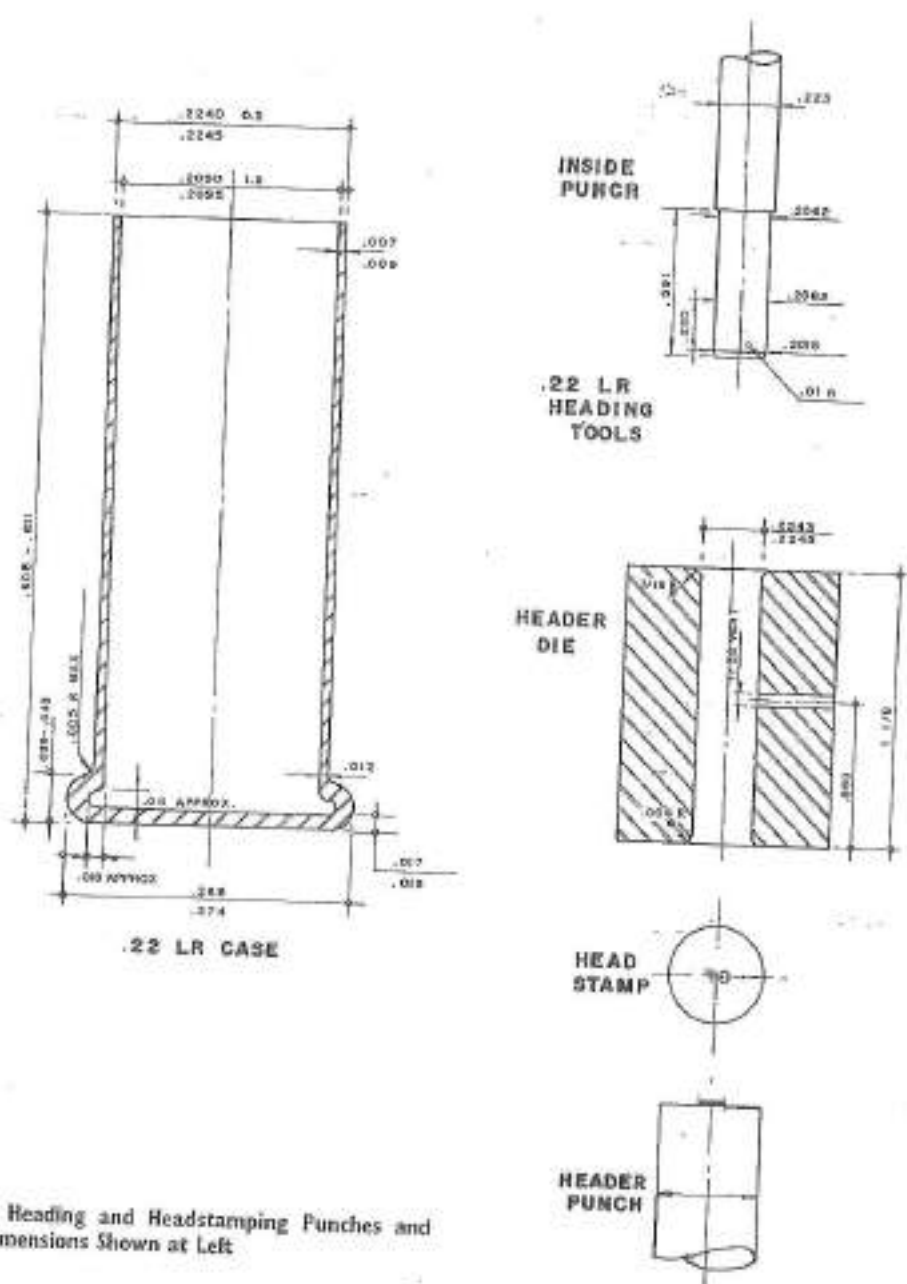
Rimfire Heading and Headstamping Punches and Dies. Head Case Dimensions Shown at Left
